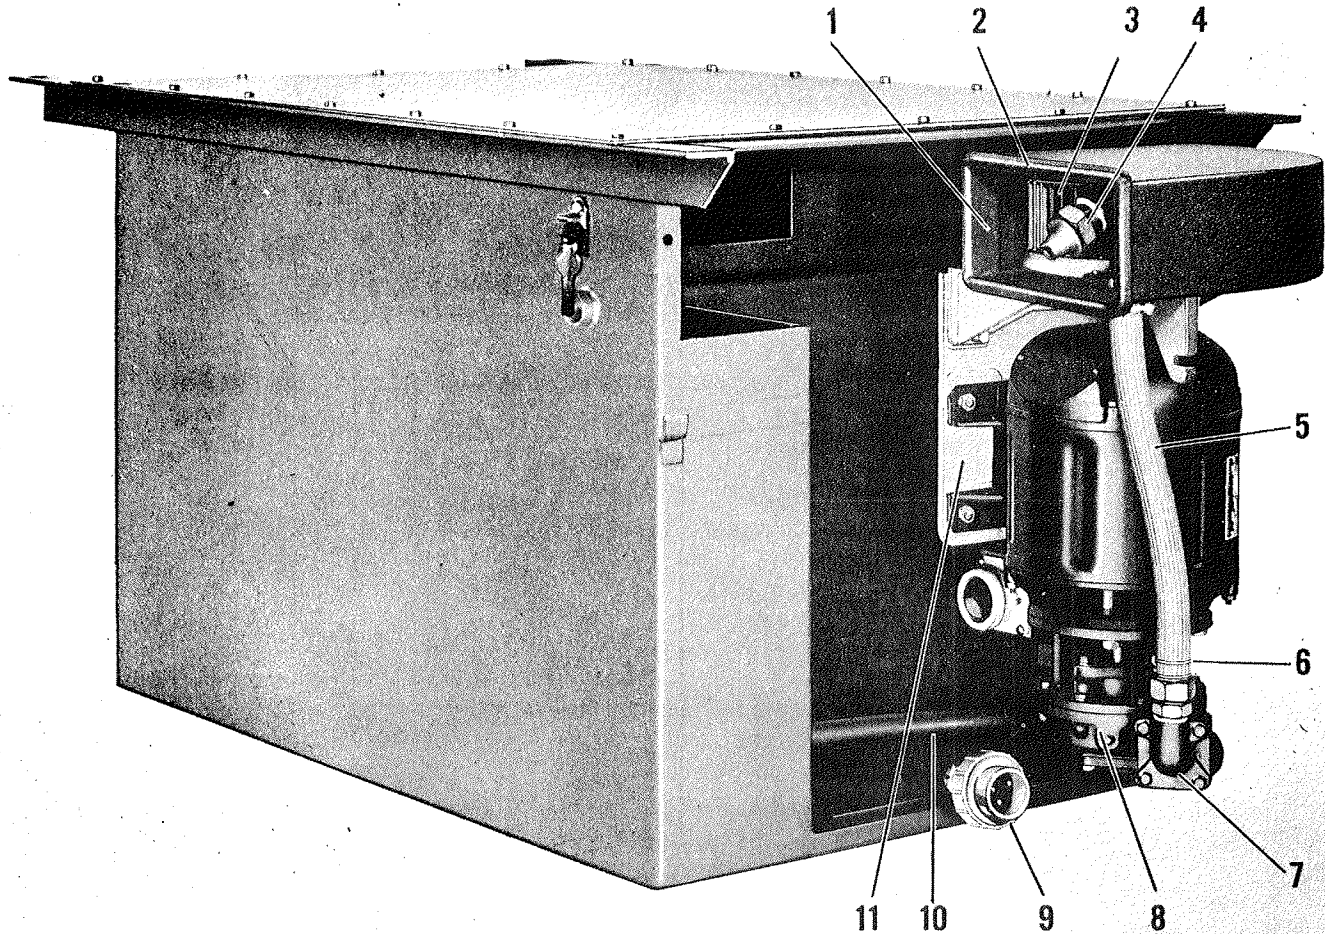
SUB-COOLER PUMP AND FAN ASSEMBLY
